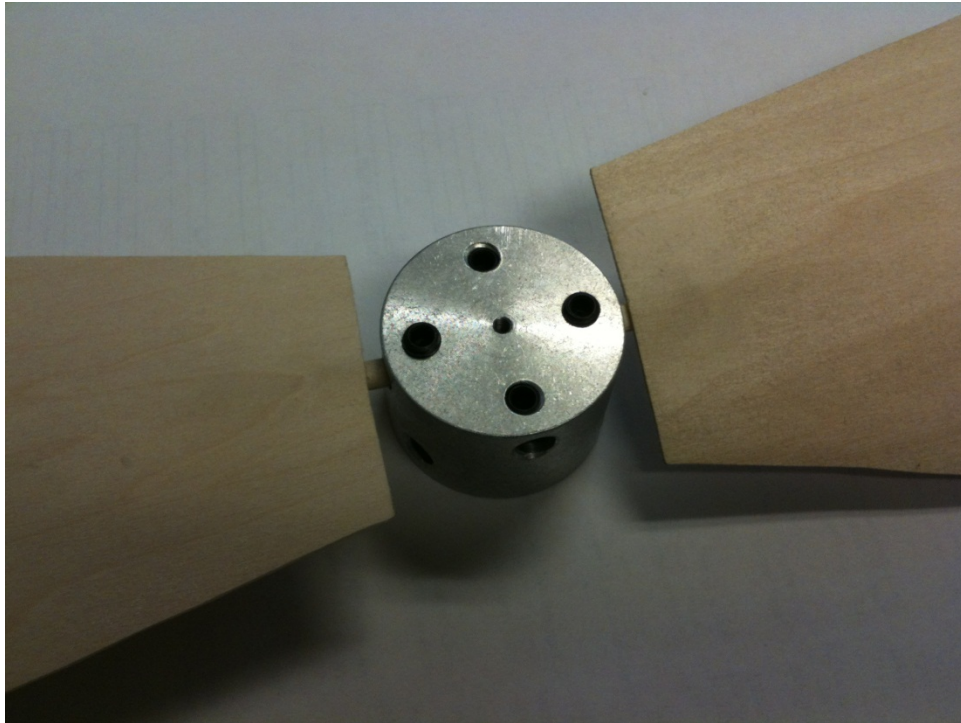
Custom-machined hub assembly threaded to M3 threads, with openings for 2, 3, or 4 blades.
